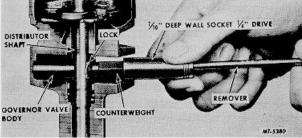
Governor Valve Removal Using SE-2072-1 Remover (Distributor housing cut away for illustration purposes).
